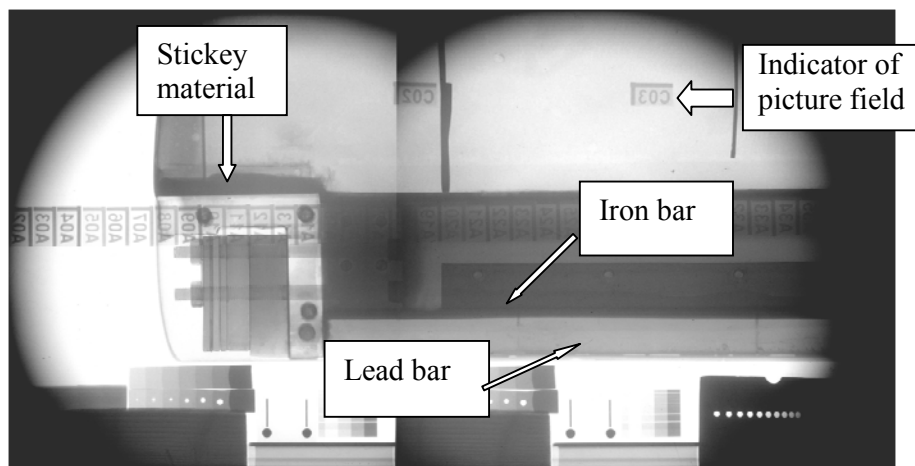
End Element of the Ka-26 Helicopter Rotor Blade Revealed by NR.
